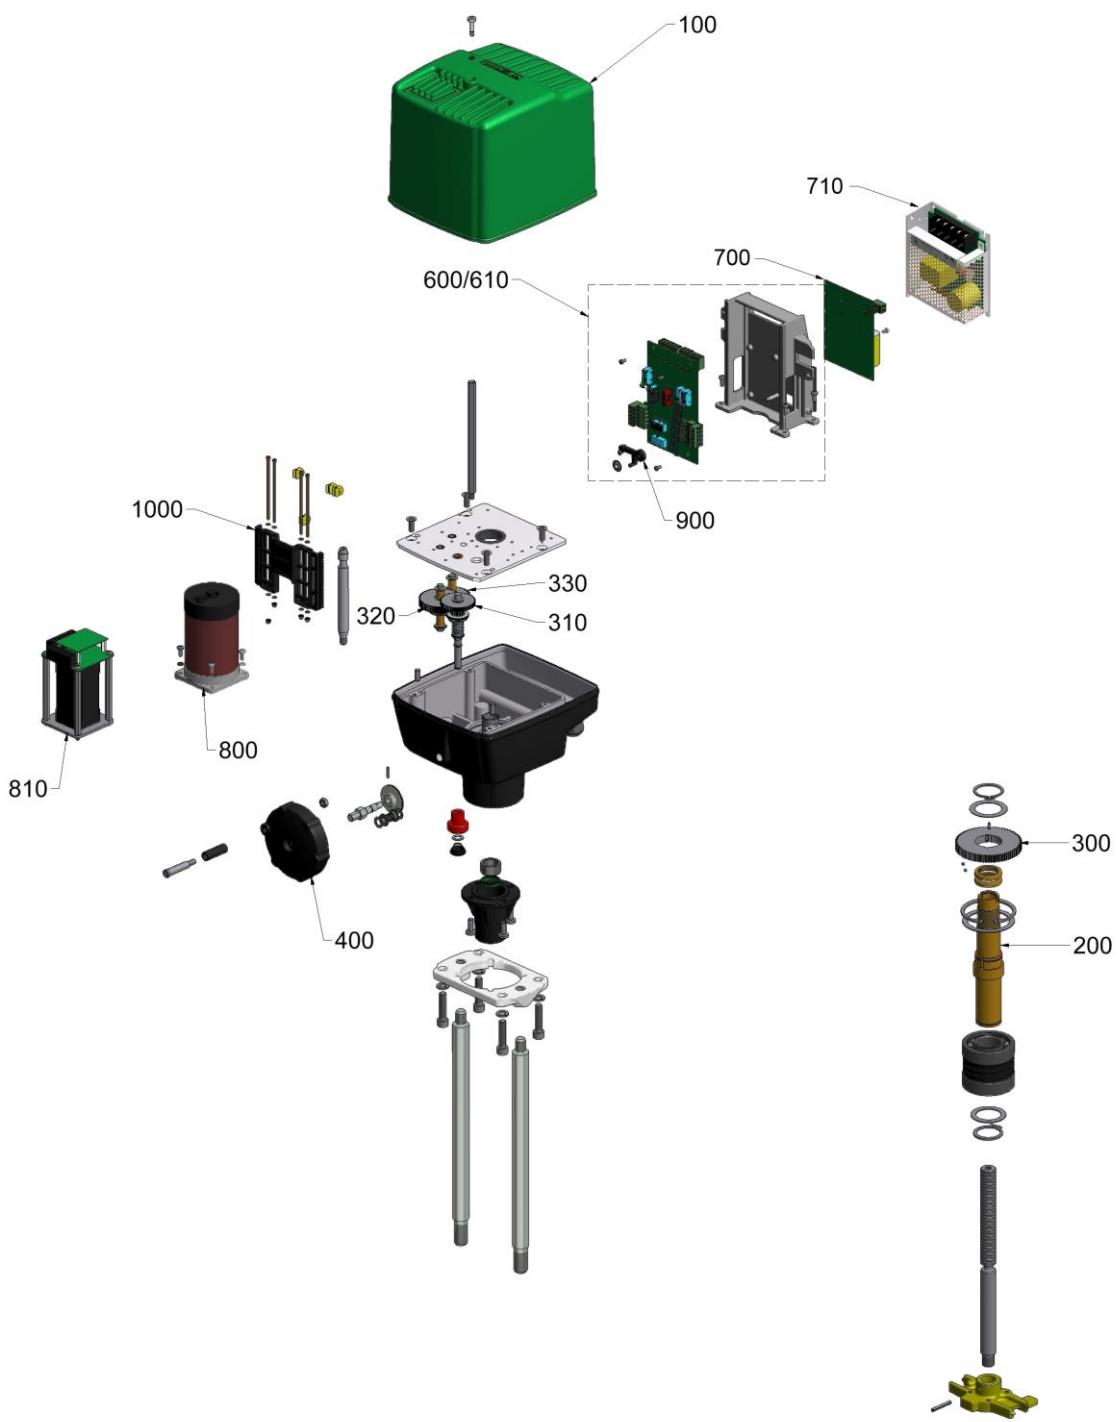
Explosion drawing REact 60/100 E/DC with stroke 60 mm
